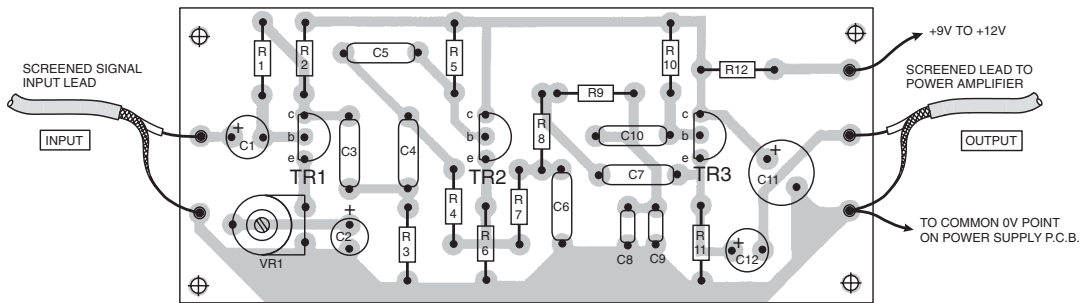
Printed circuit board component layout, wiring and full-size copper foil master for the Bandpass Filter.
